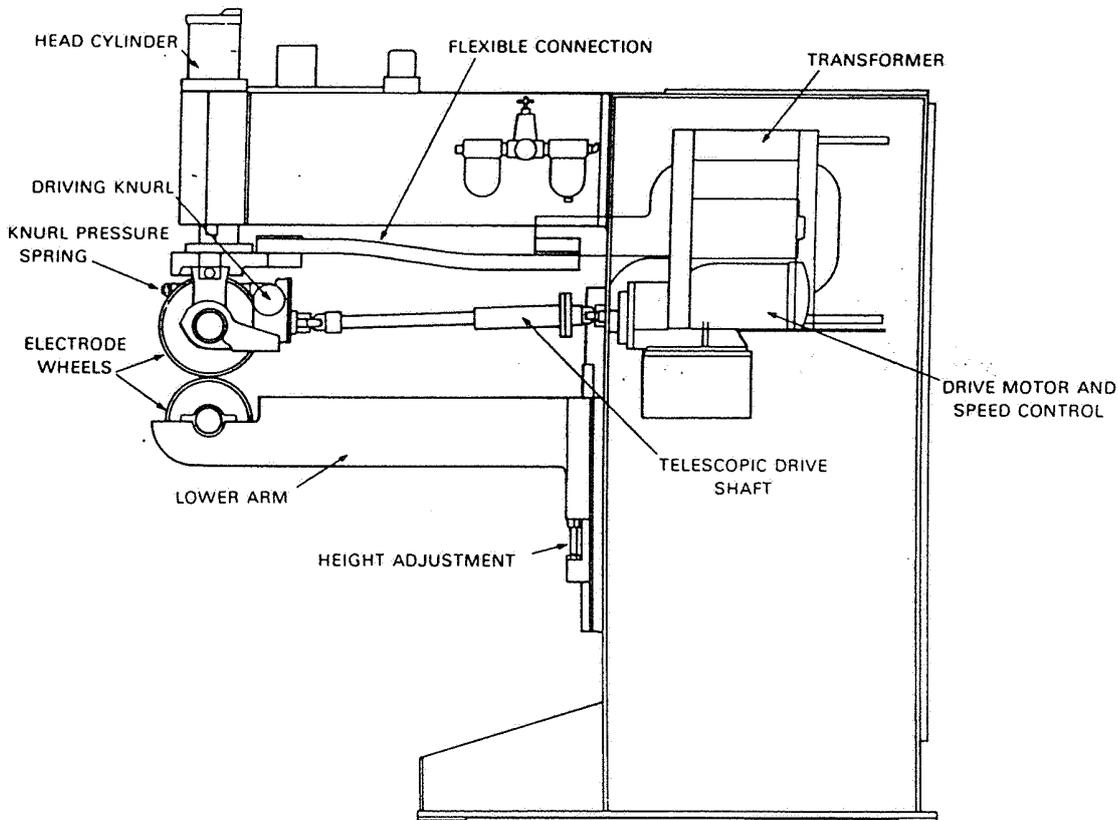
LONGITUDINAL SEAM WELDER
